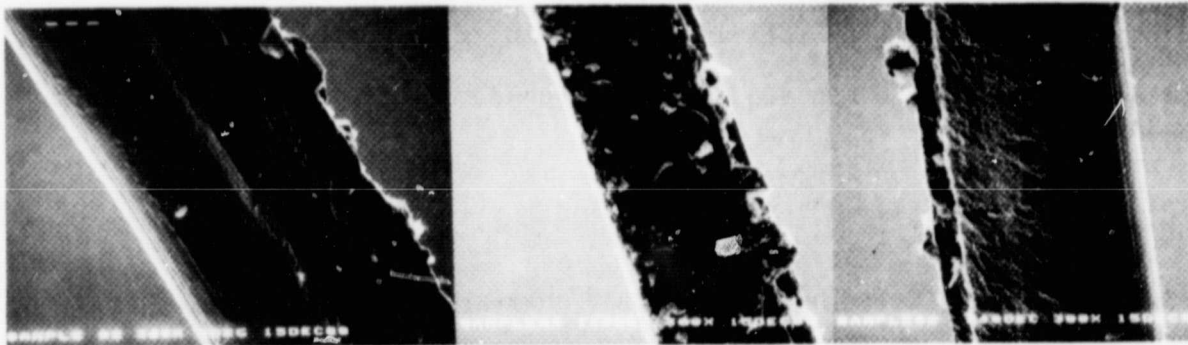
Three views of an electroformed wire showing preferential plating on cutting edge only
